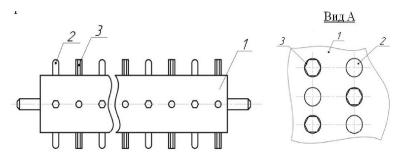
A pile drum used in a cotton cleaner 1- drum; 2- bladeless hammers; 3-6-blade hammers
